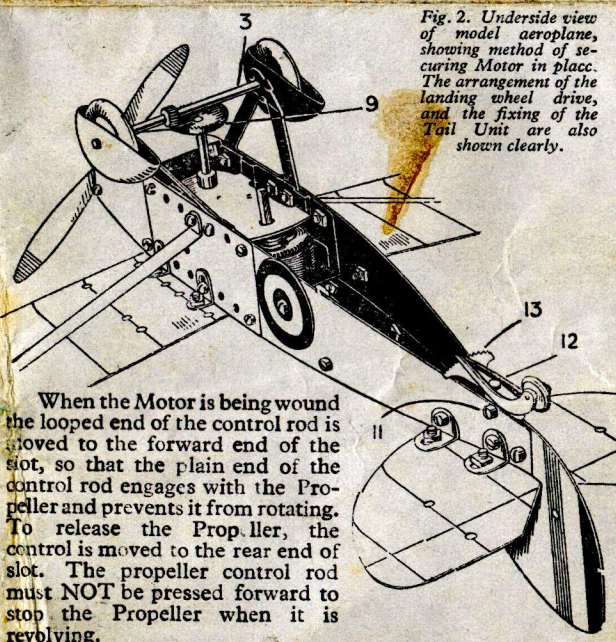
Underside view of model aeroplane, showing method of securing Motor in place. The arrangement of the landing wheel drive, and the fixing of the Tail Unit are also shown clearly.
